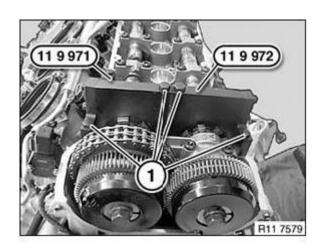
Identifying Special Tools (11 9 971) And (11 9 972) Courtesy of BMW OF NORTH AMERICA, INC.
